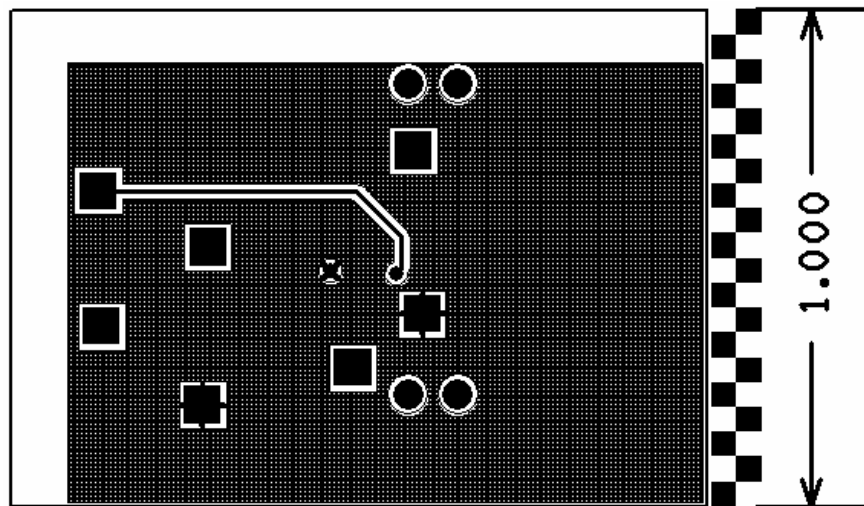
SP6682 PC LAYOUT BOTTOM SIDE
